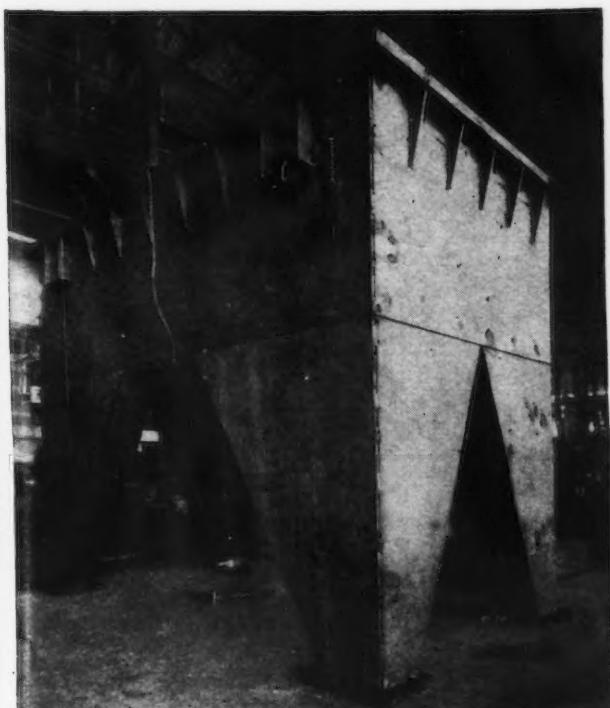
Welded pedestal . . . about 15 ft. high.
